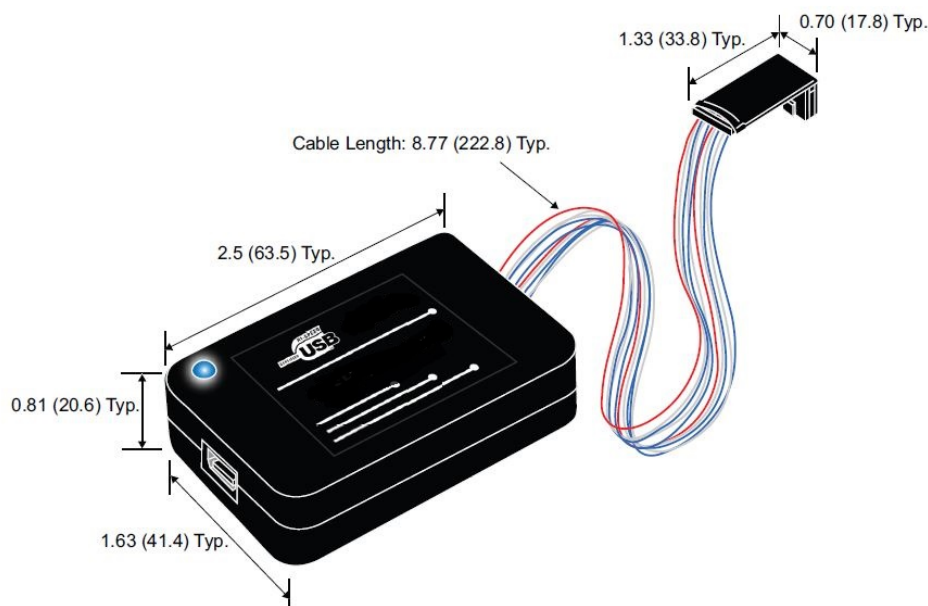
Intel FPGA Download Cable II Dimension - Inches and Millimeters
